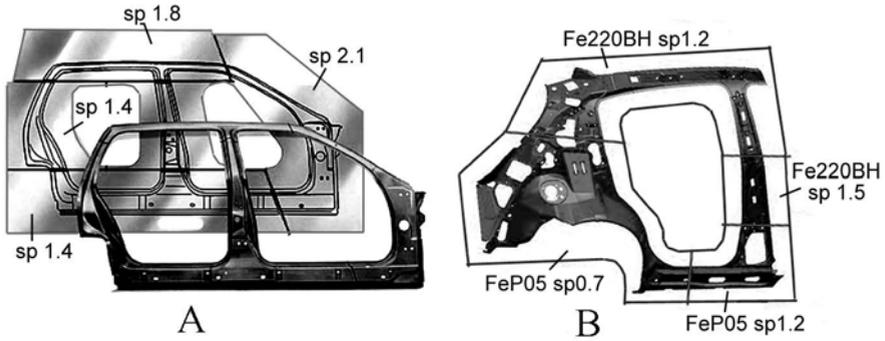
Examples of body side tailored blanks: outer body side (A); inner rear body side (B).
